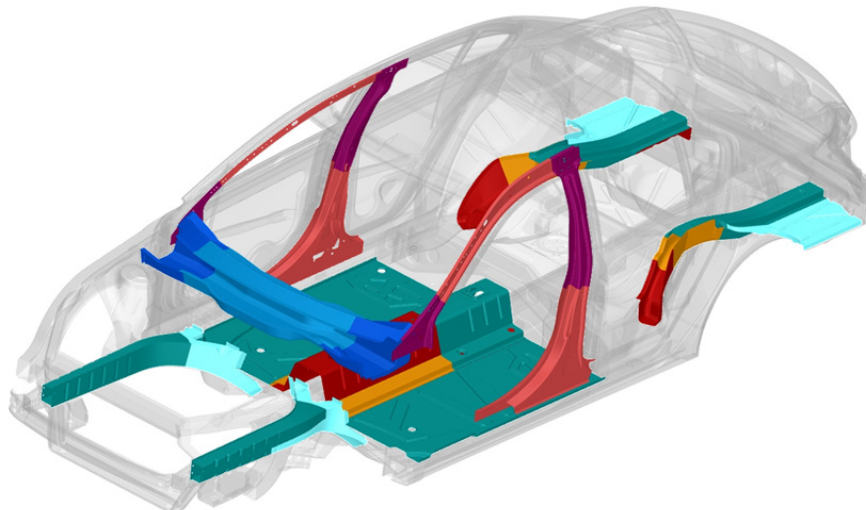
LWV Body Structure Stamped parts made from Laser Welded Blanks
